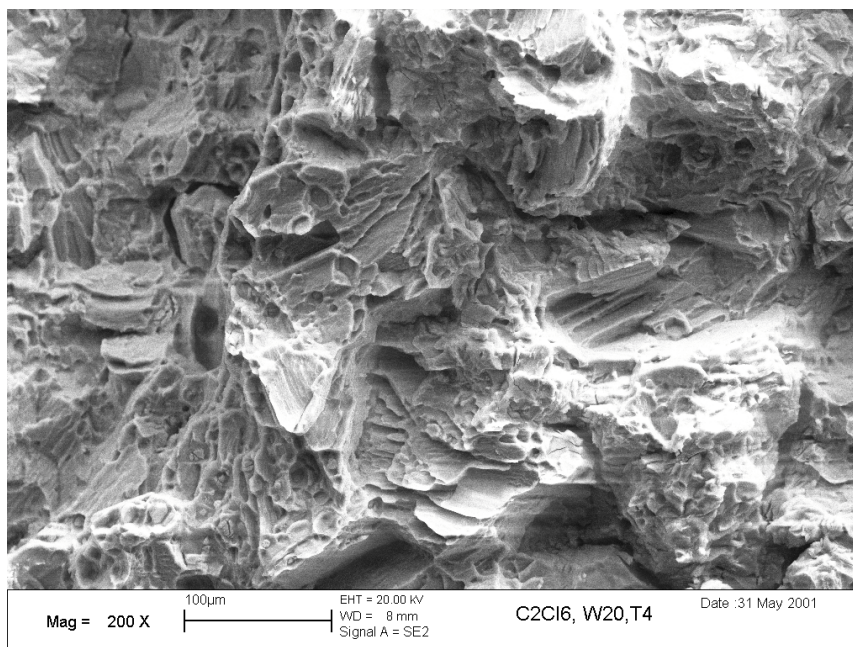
Fracturegraph of the grain-refined sample machined from the 20 mm thick plate, T4 condition.
